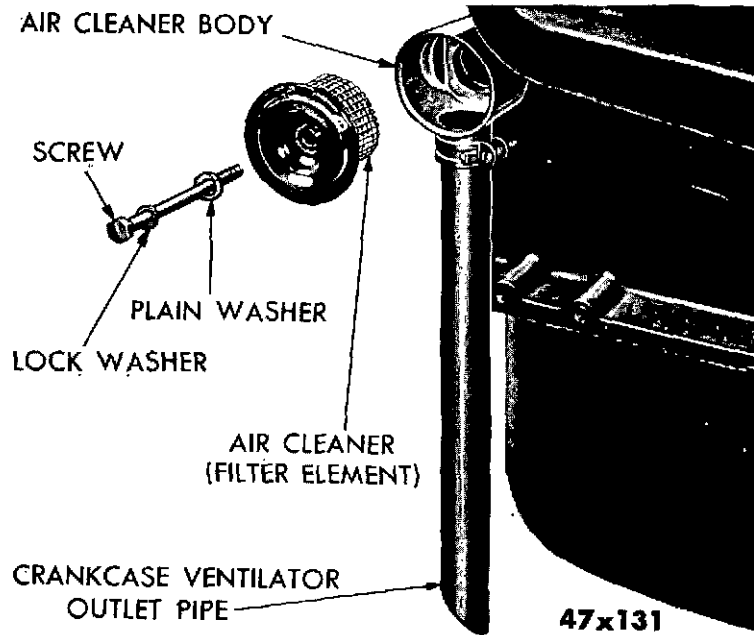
Crankcase Ventilator Outlet Pipe Air Cleaner
